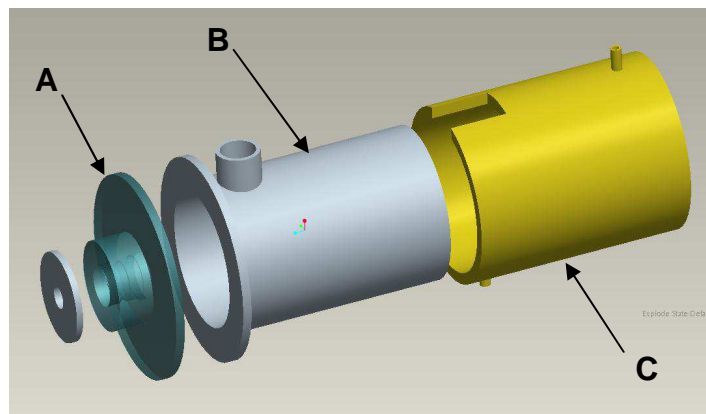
Exploded view of mill chamber assembly. A – end flange, B – mill chamber and C – water jacket.
